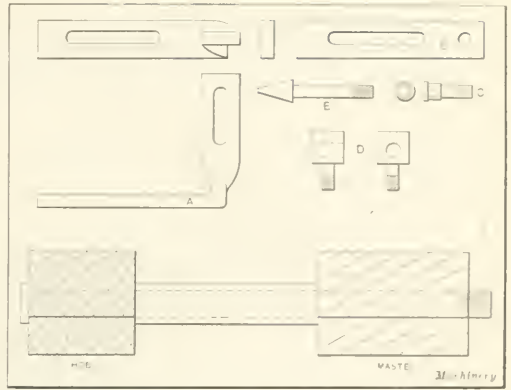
Parts of Attachment shown in Fig. 1, and Hob and Master set up on Arbor
